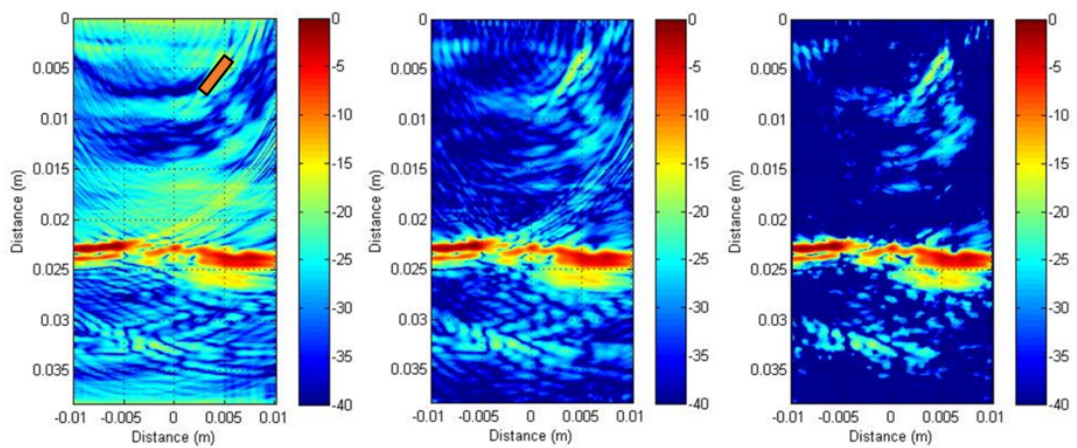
TFM, Filtered TFM and SASACI images of Flaw 5 within the stainless steel weld. Flaw 5 is a centreline crack that starts just below the surface and ends just above the back wall of the specimen. The top of the crack can be seen at a depth of 8mm and the bottom is visible at a depth of 20mm. These reflections are most clear in the SASACI image.
